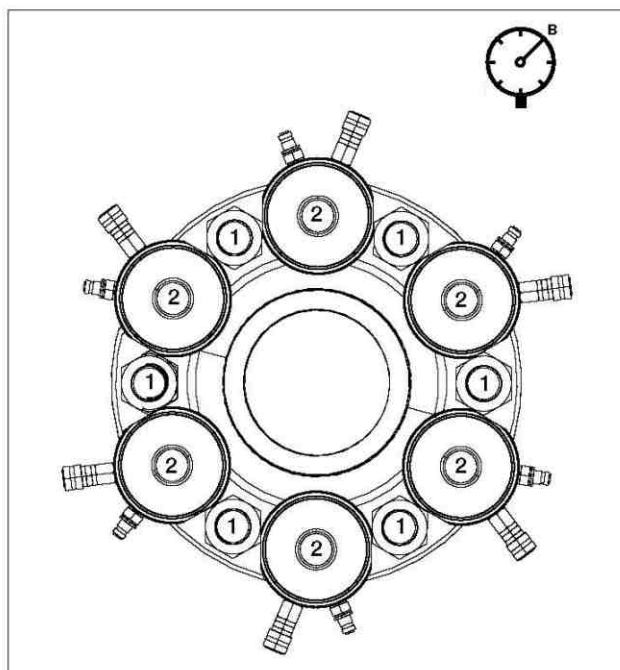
Tensioner Arrangement, Second Pass -
